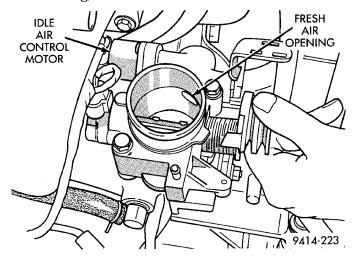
Idle Air Control Motor Air Bypass Passage— Typical
